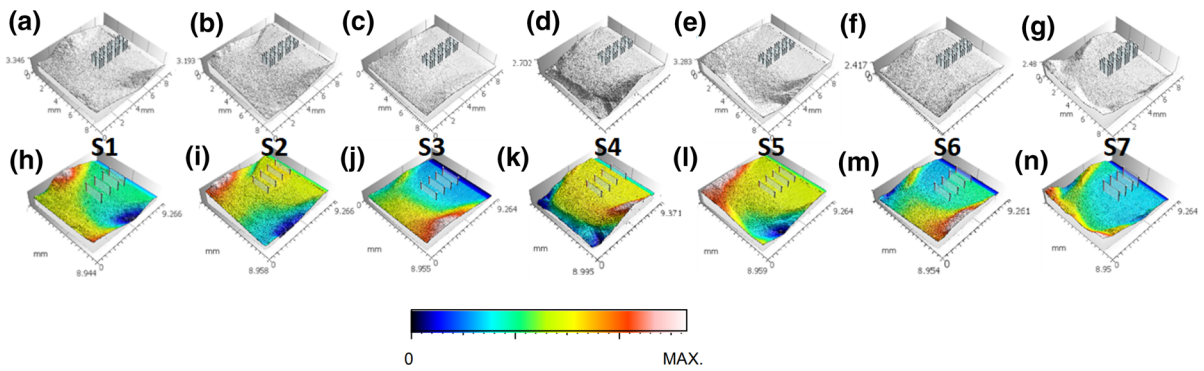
presents the 3D views of specimen fractures S1 to S7 with the marked areas A1 to A4 (Fig. 4a–g) and the marked profiles P1 to P4 (Fig. 4a–g) in pseudo colour views. The scale represents the z-axis height of the individual fatigue fracture surface points. Overall, important differences in the colour gradients can be observed which can be associated with the different stress levels and applied stress ratios. We can see that the lower values are present near the notch region.
